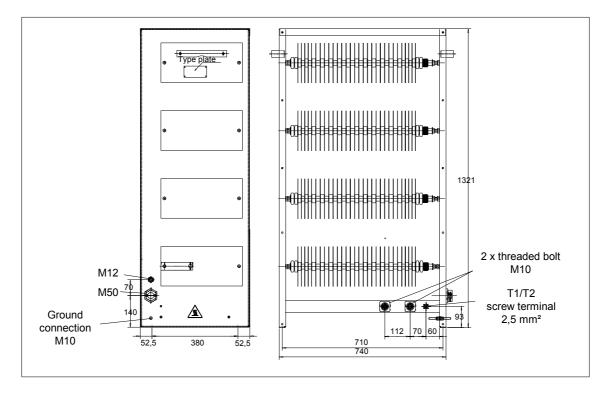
Dimension drawing of the braking resistor for option L62
